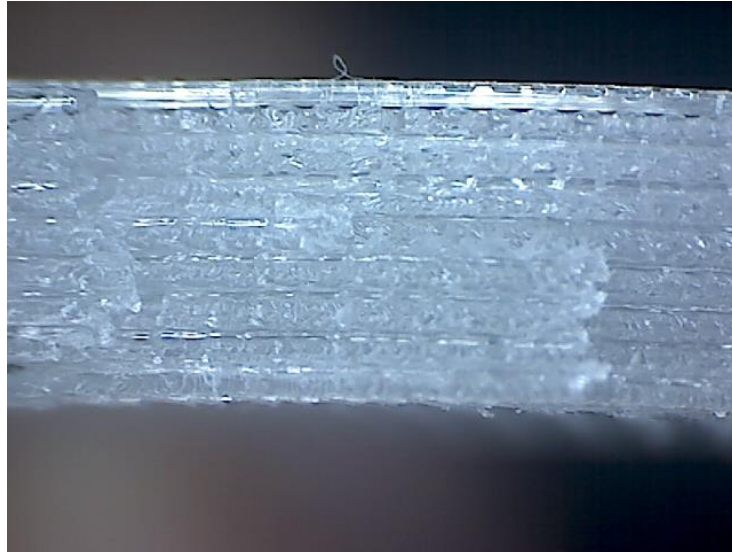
Fracture surface of a +/- 45° toolpath orientation continuous build PC tensile specimen.
